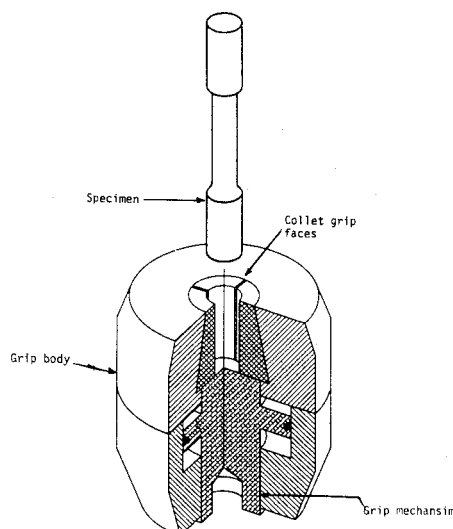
Example of a Smooth, Split Collet Active Gripping System for Cylindrical Specimens
